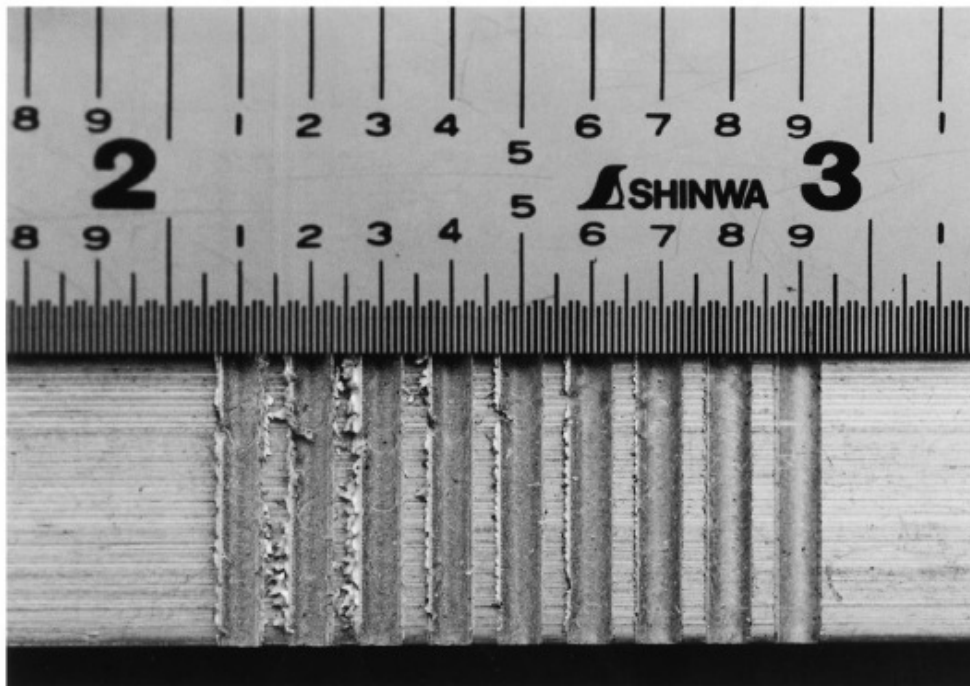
The burr free (right) and the burr (left) slots on an aluminum workpiece after machining with a new to worn out microend-mill (Bao and Tansel 2000^b).
